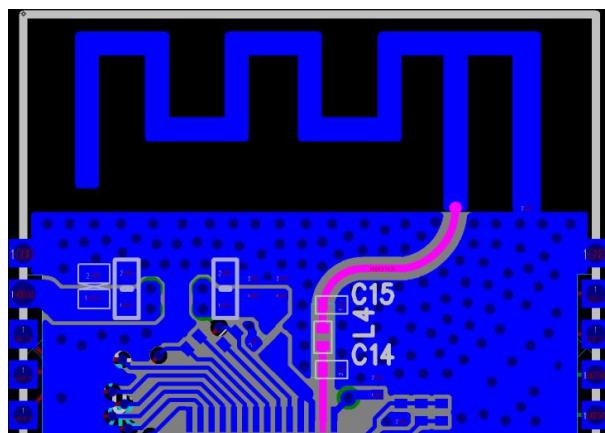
ESP32 RF Layout in a Four-layer PCB Design
